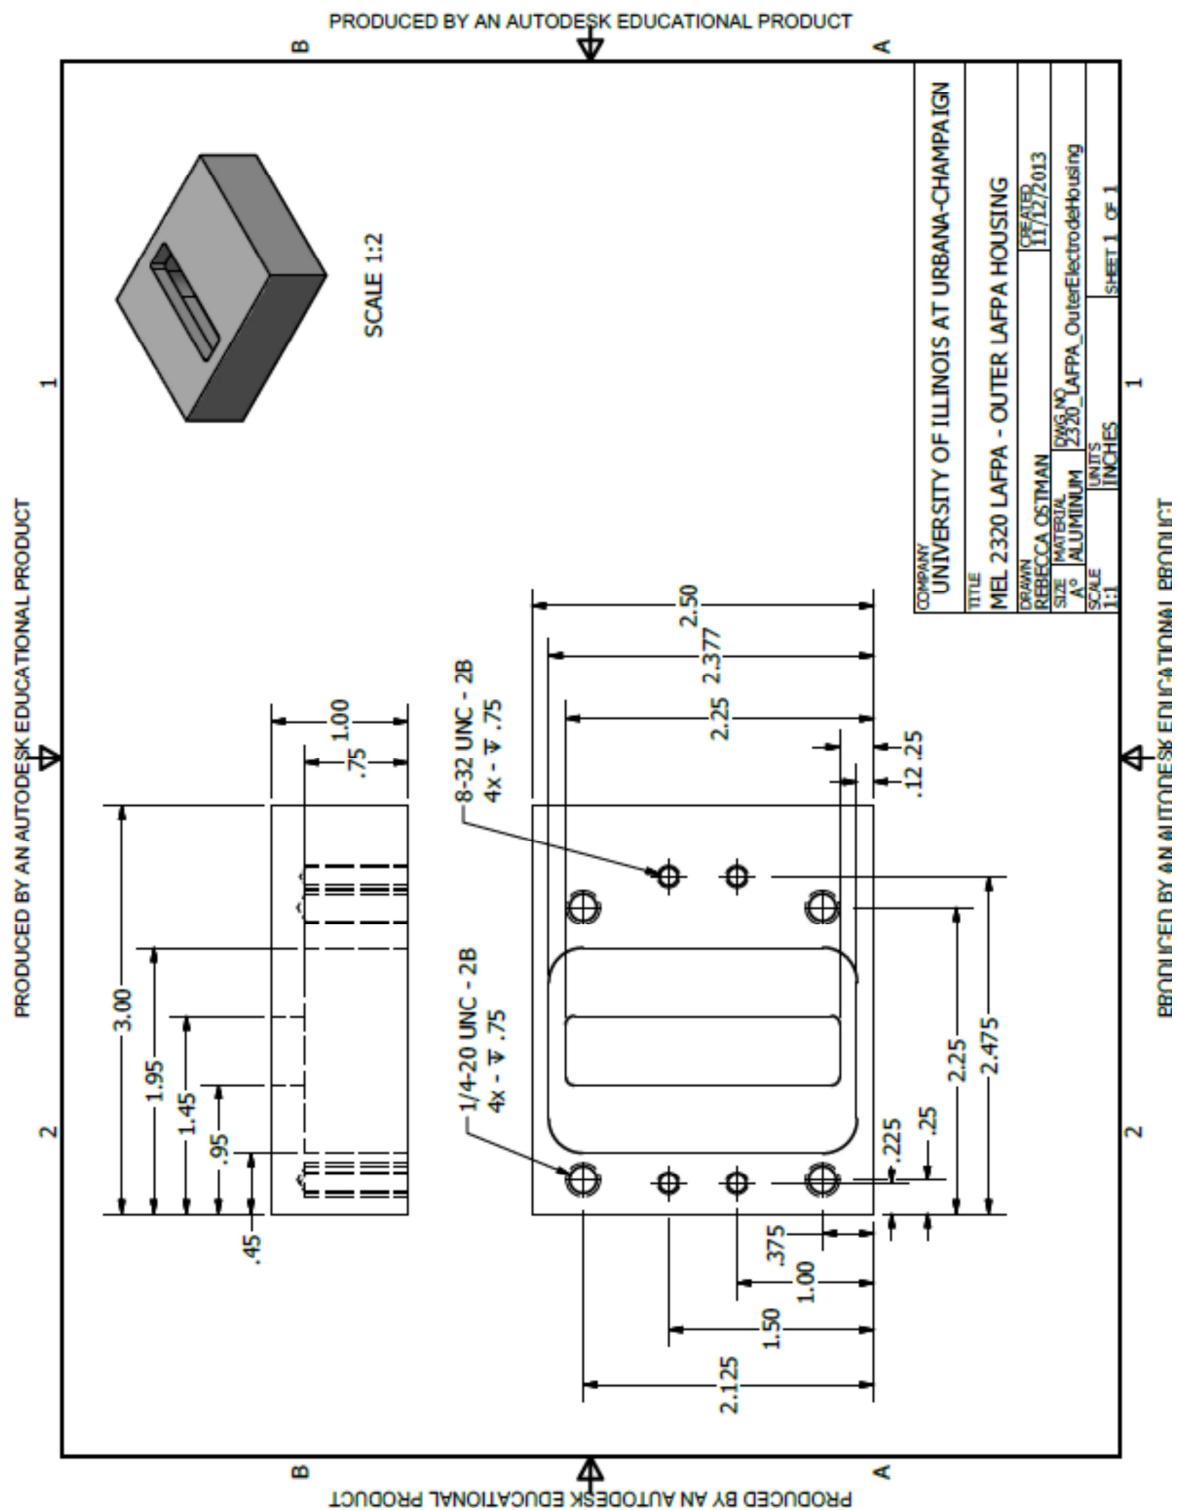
Drawing and specifications for the outer piece of the electrode housing for the LAFPAs upstream of the ramp corner assembly.
